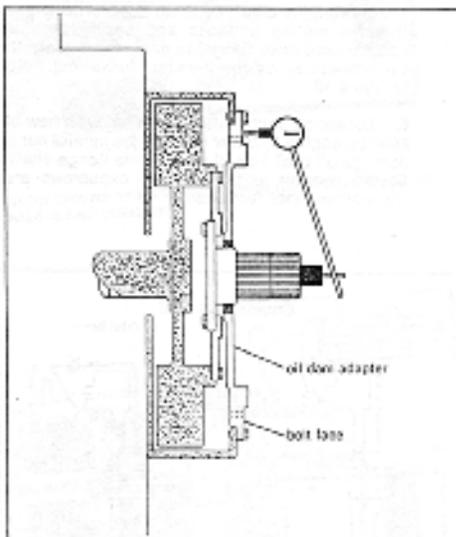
Dial Indicating Oil Dam Adapter Bolt Face.
